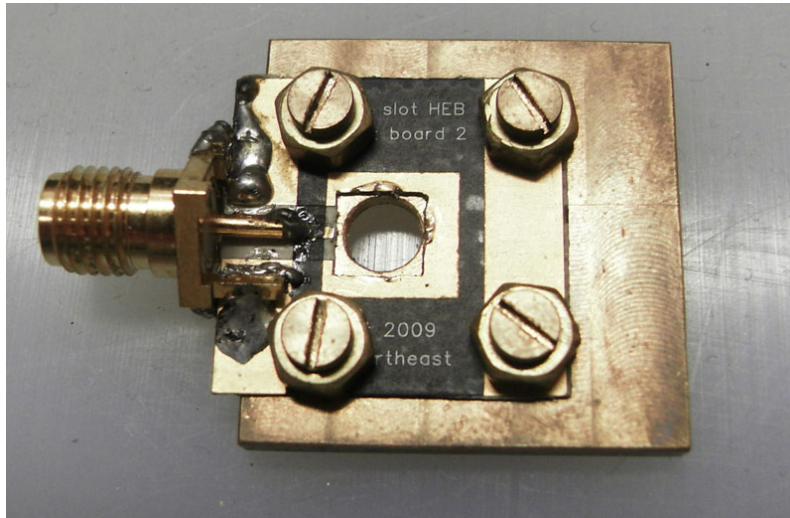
A variant with a coplanar waveguide taking the signal to a single SMA connector. The PCB is mounted on a brass place with a hole over which the chip is to be mounded.
